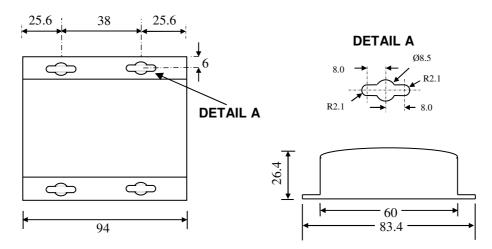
OSD2166M MOUNTING DIMENSIONS
